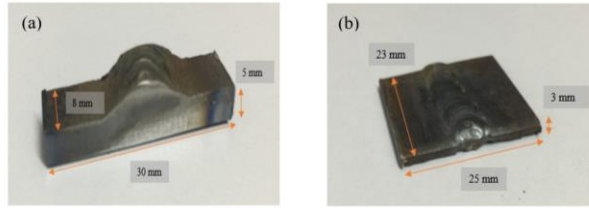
Samples dimension of (a) MIG welding, MAG welding, and (b) TIG welding
